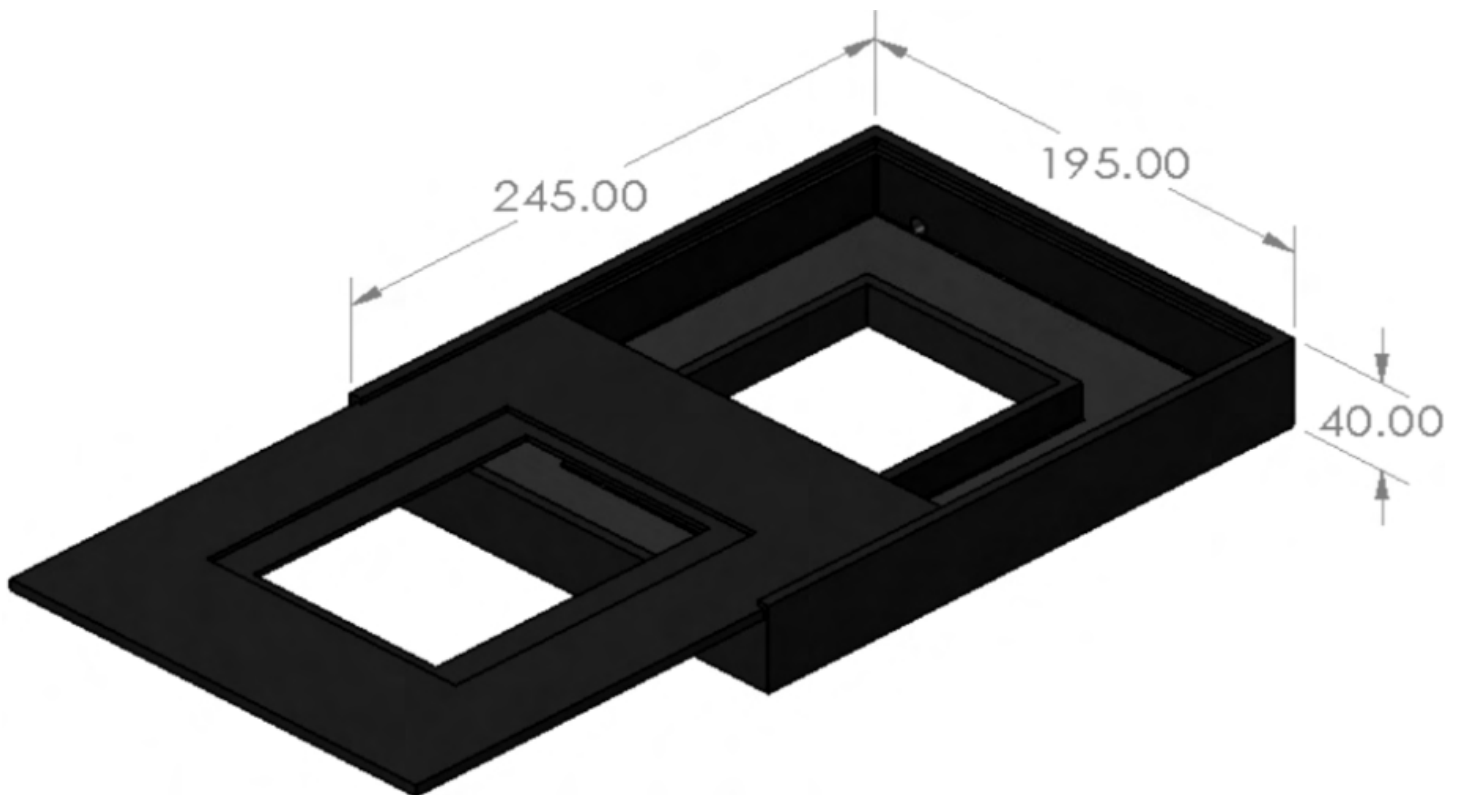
Slide Top Acrylic Incubator drawing with dimensions in millimeters.
